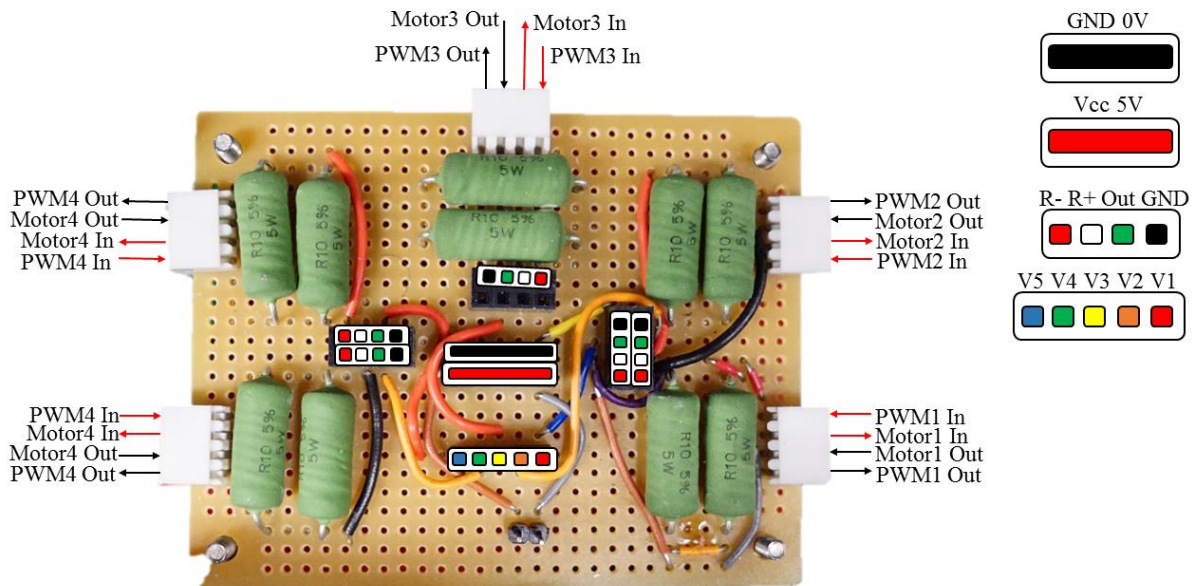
SOLDER BOARD WIRING DIAGRAM
